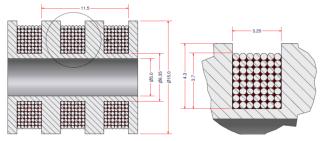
HeLiCal Nb-Ti undulator dimensions(mm)
